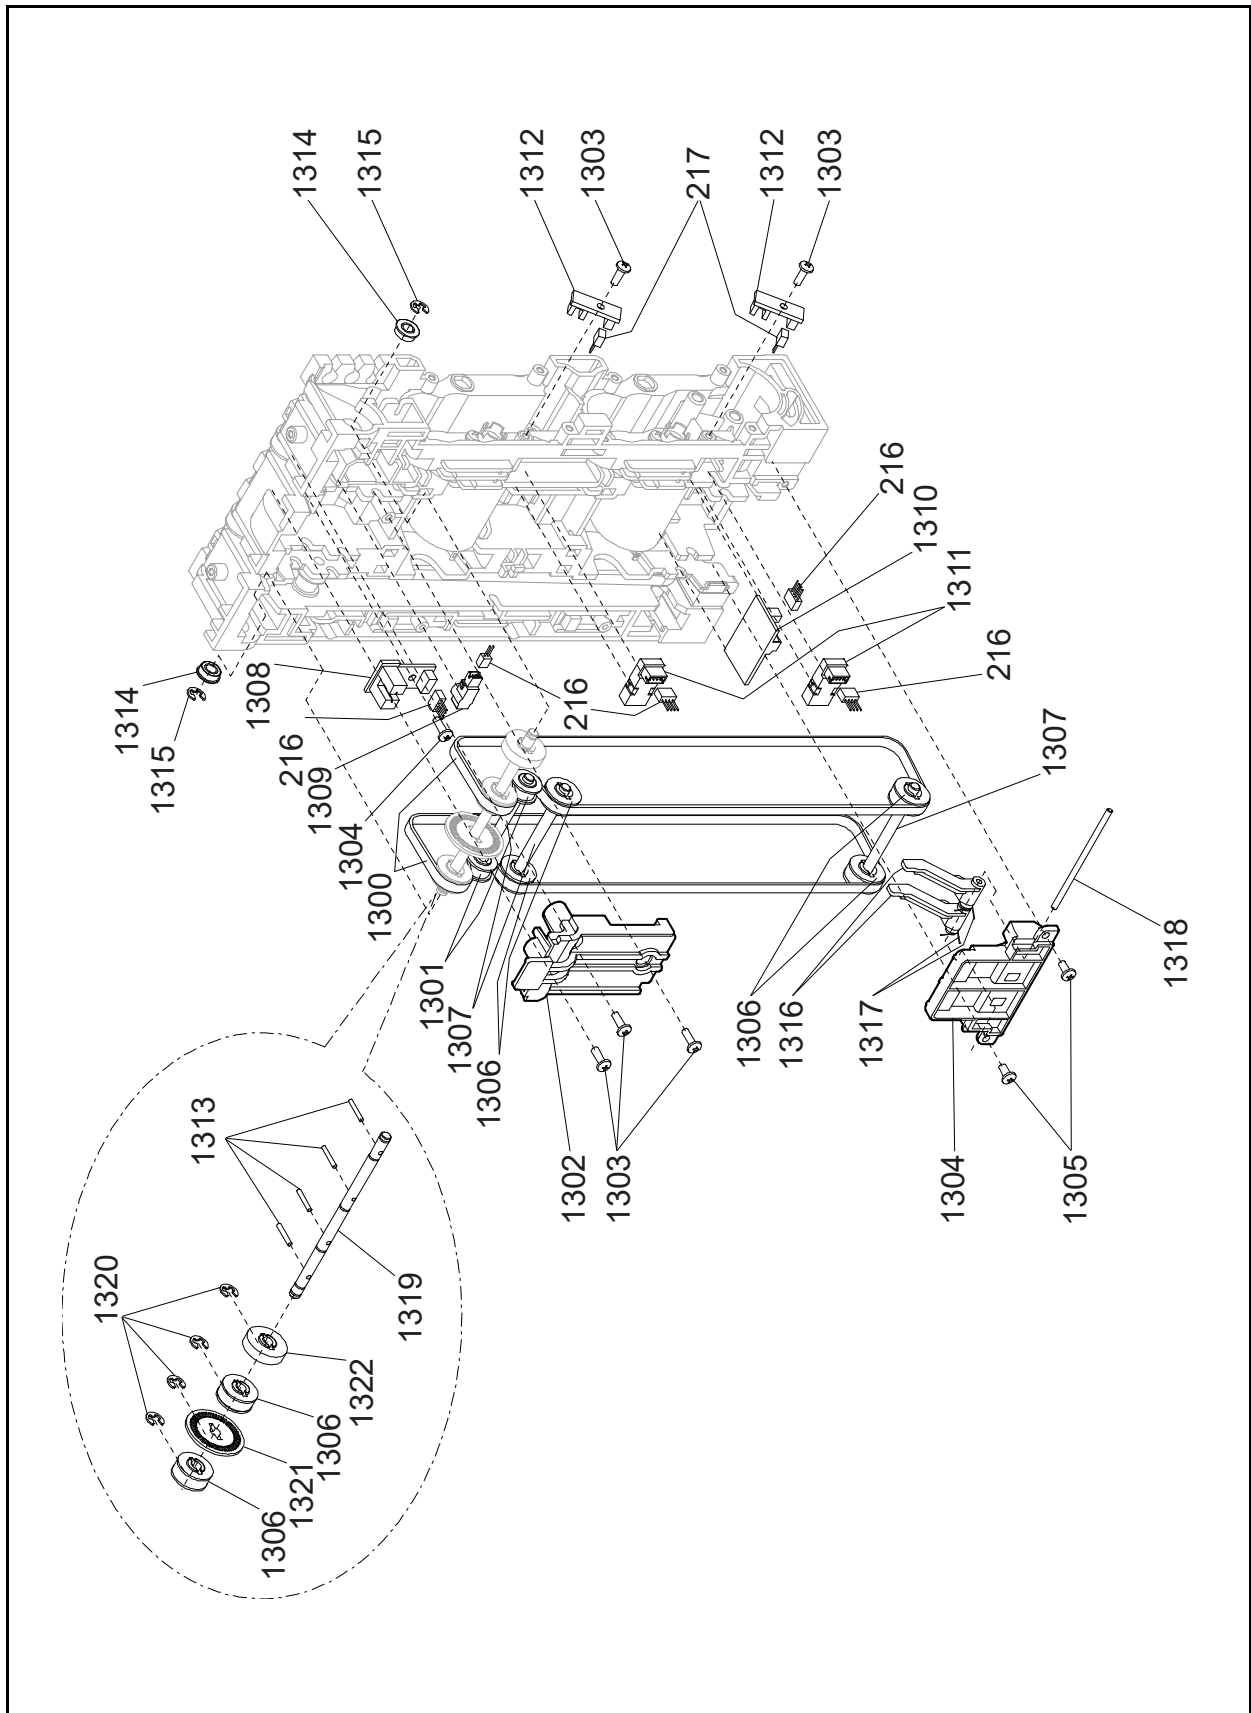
iPRO-RC Rear Transport Assembly 3 Exploded View
